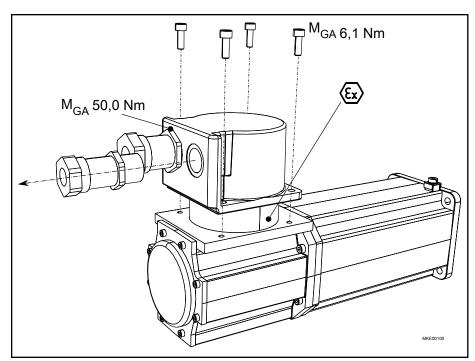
Electric Connection MKE037, MKE047, MKE098 Housing Design "E"
